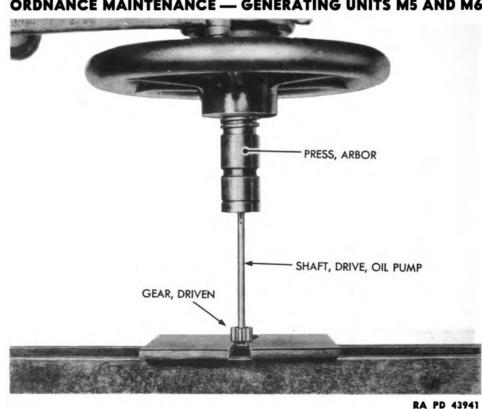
Pressing Oil Pump Driven Gear on Oil Pump Drive Shaft (Second Operation)
